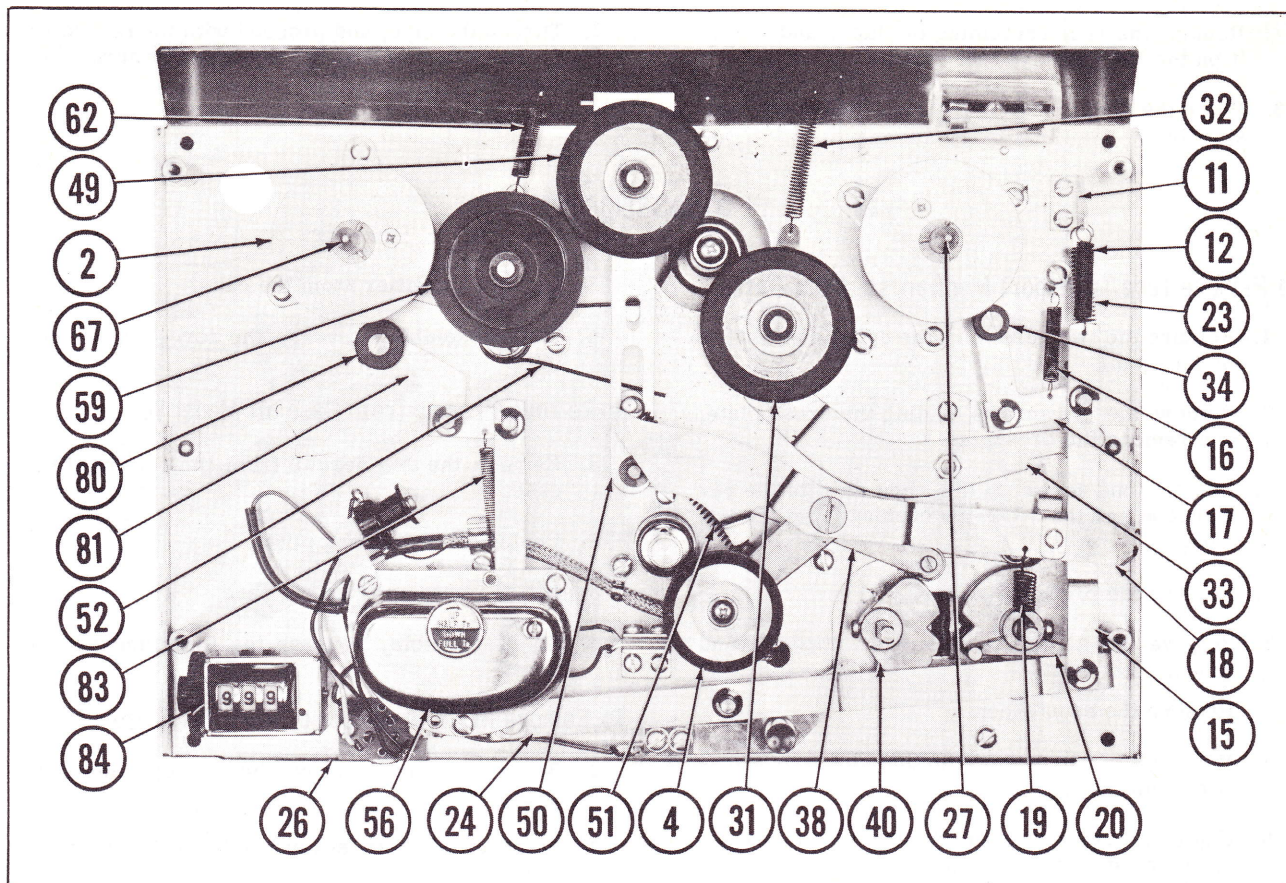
TOP VIEW OF MECHANISM WITH ESCUTCHEON REMOVED.
